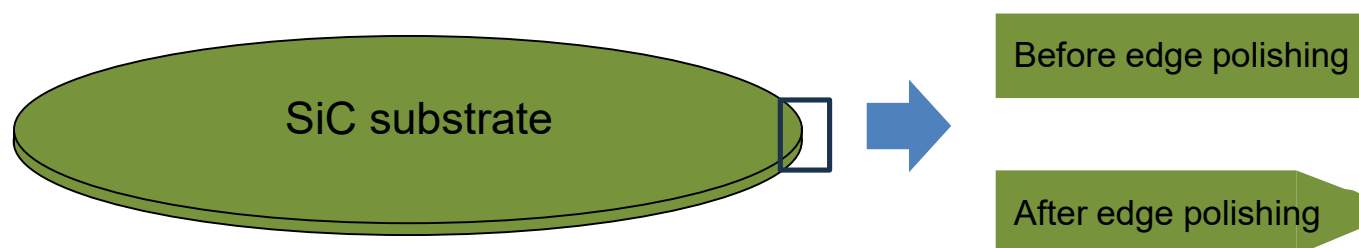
Examples of cross-sectional shapes of the wafer edge before and after edge grinding
